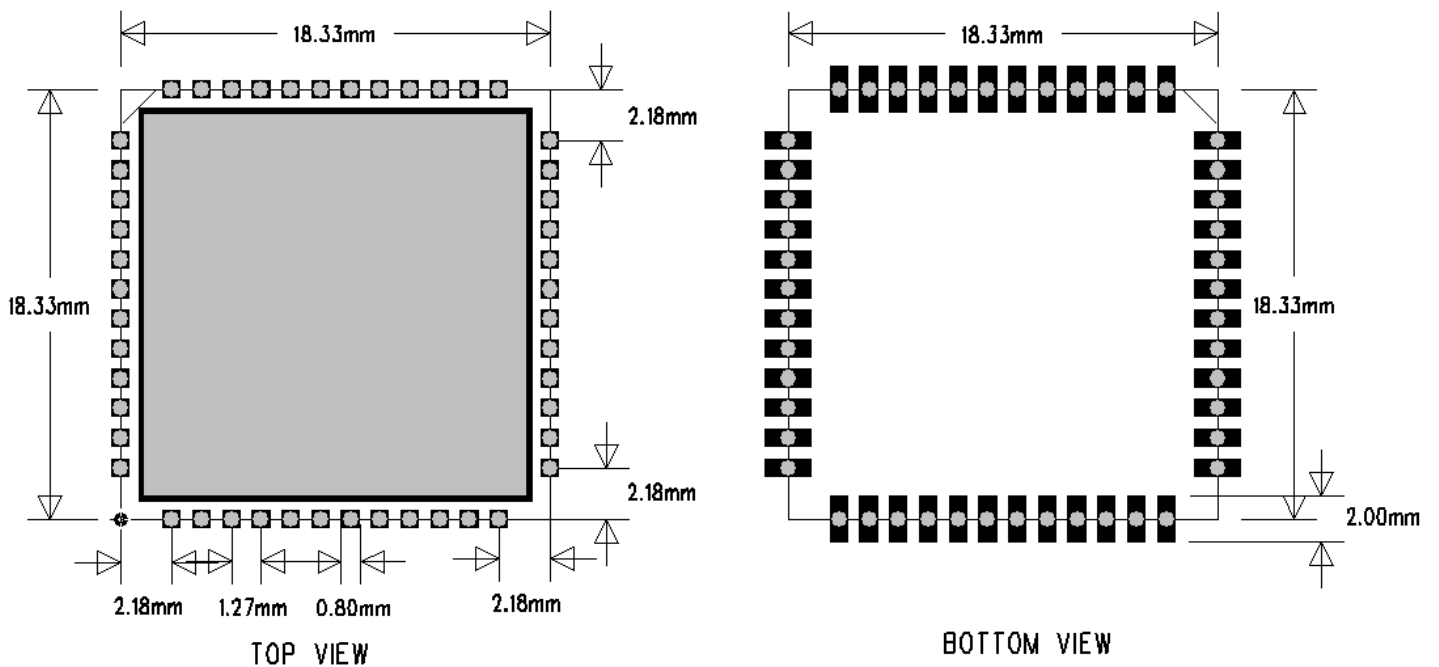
Recommended PCB Footprint of RF-AL42UHB2 (mm)
